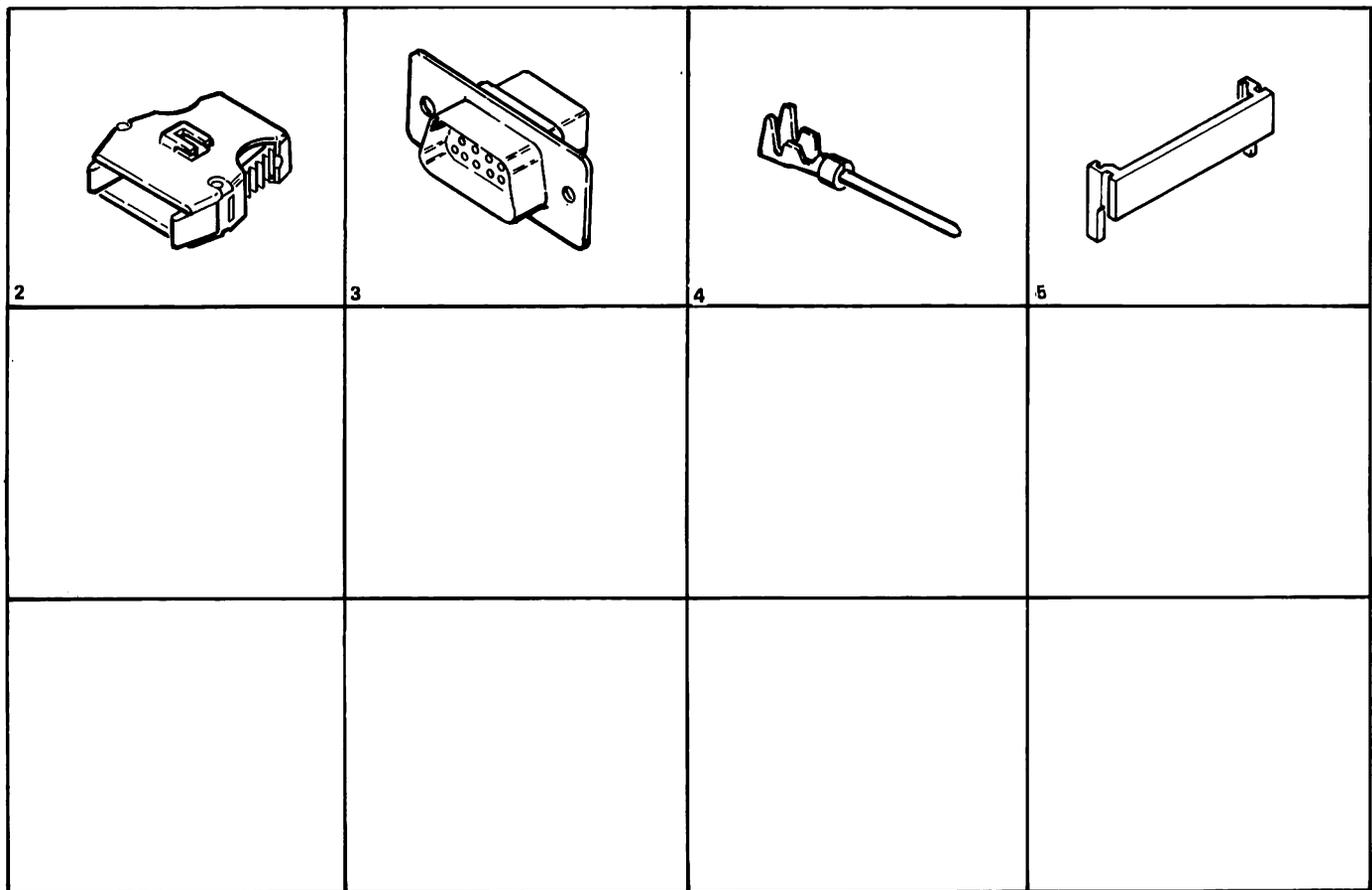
CABLE ASSEMBLIES WITH COMPONENT PARTS. SEE LIST 8.
